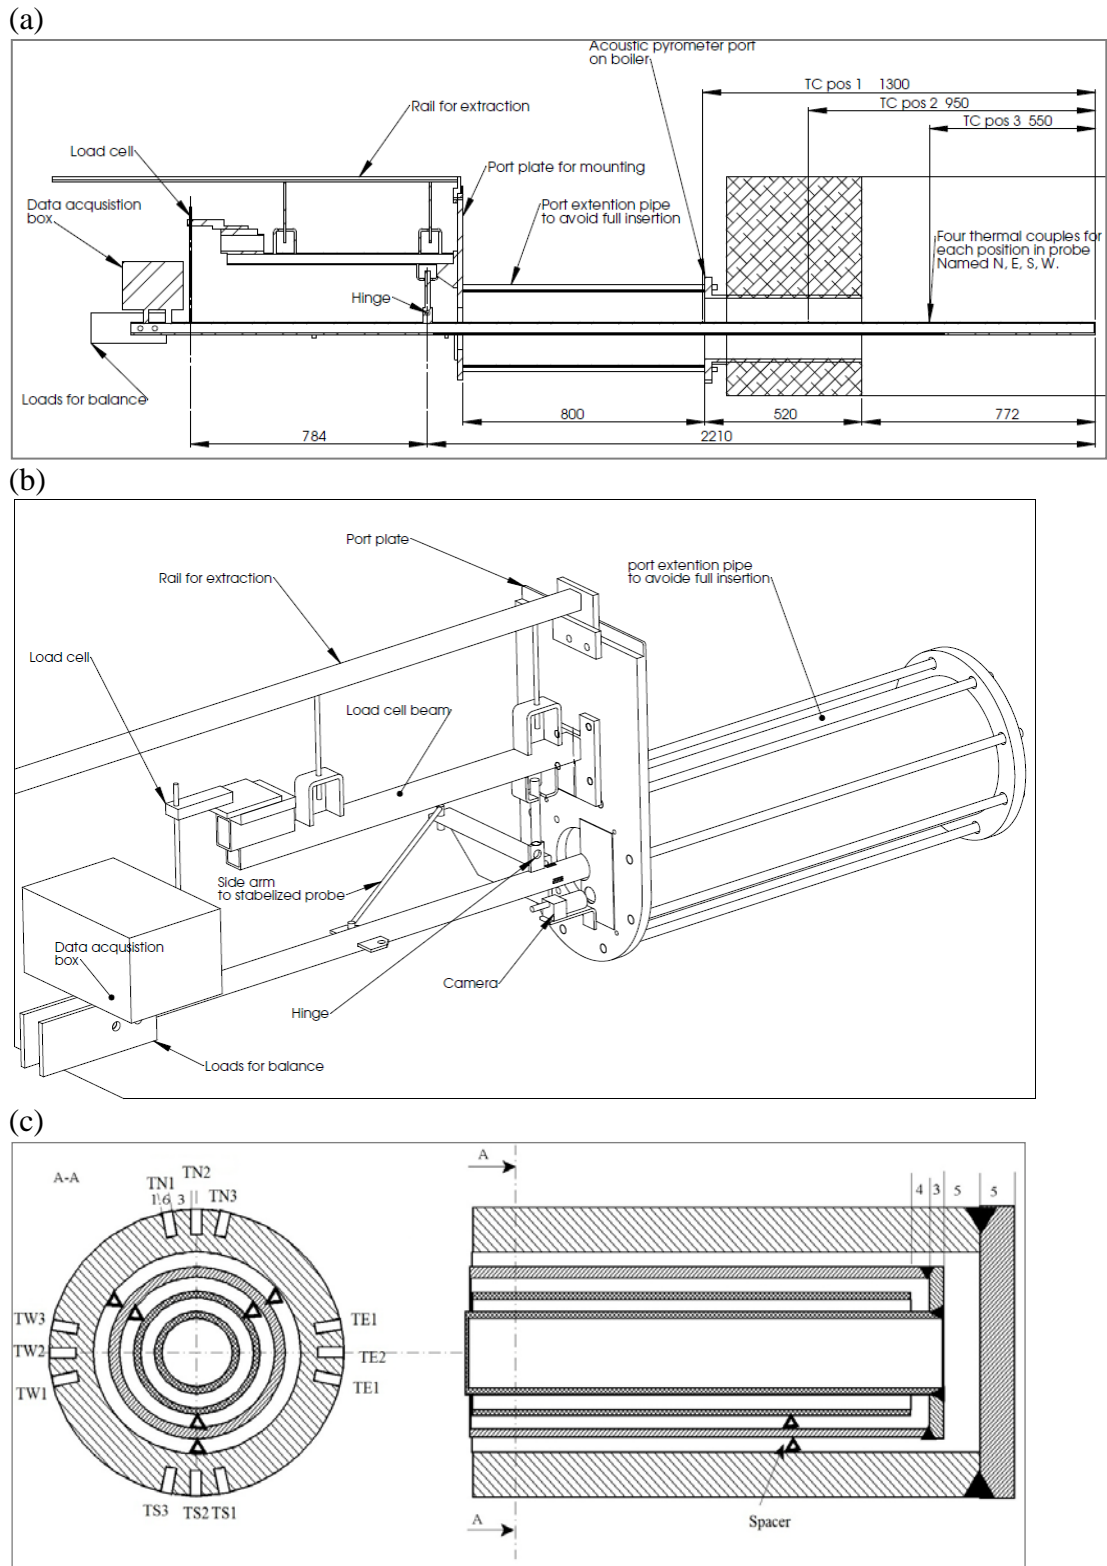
a) Schematic drawing of the probe with identified positions of temperature measurements, deposition area, port extension pipe, port plate for mounting, hinge, load cell and rail for pulling out the probe, b) layout of the complete probe set up, c) cross-sectional view perpendicular to the probe axis and cross-sectional view along the axis of annuli.
